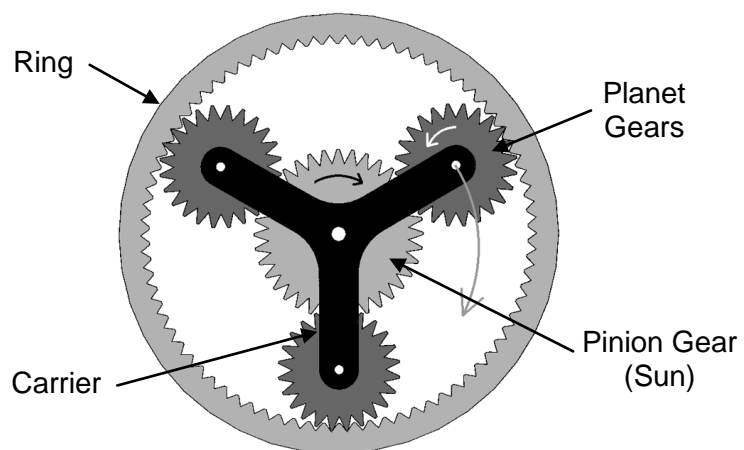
Front-view cross-section diagram of a planetary gearbox, [115]
